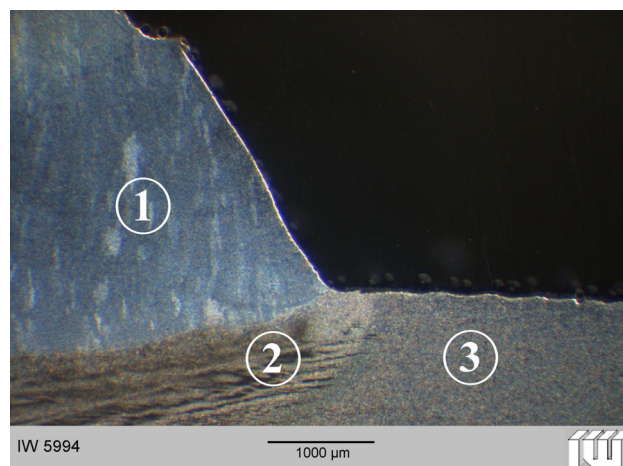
Weld Toe of Y\_5 (as Welded)
